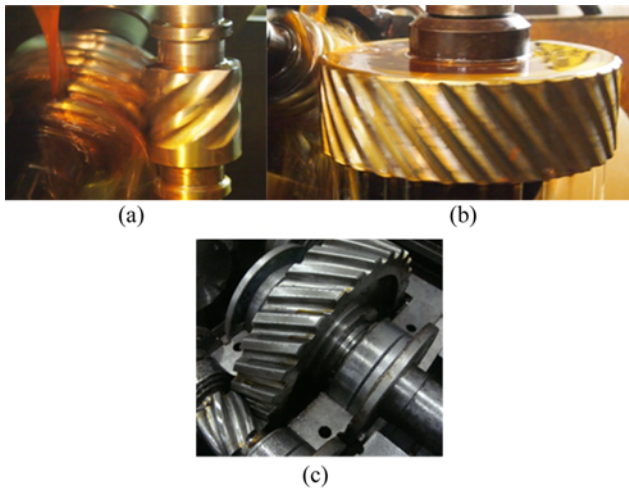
Processing of the gear pair: (a) pinion, (b) gear, and (c) gear prototype
